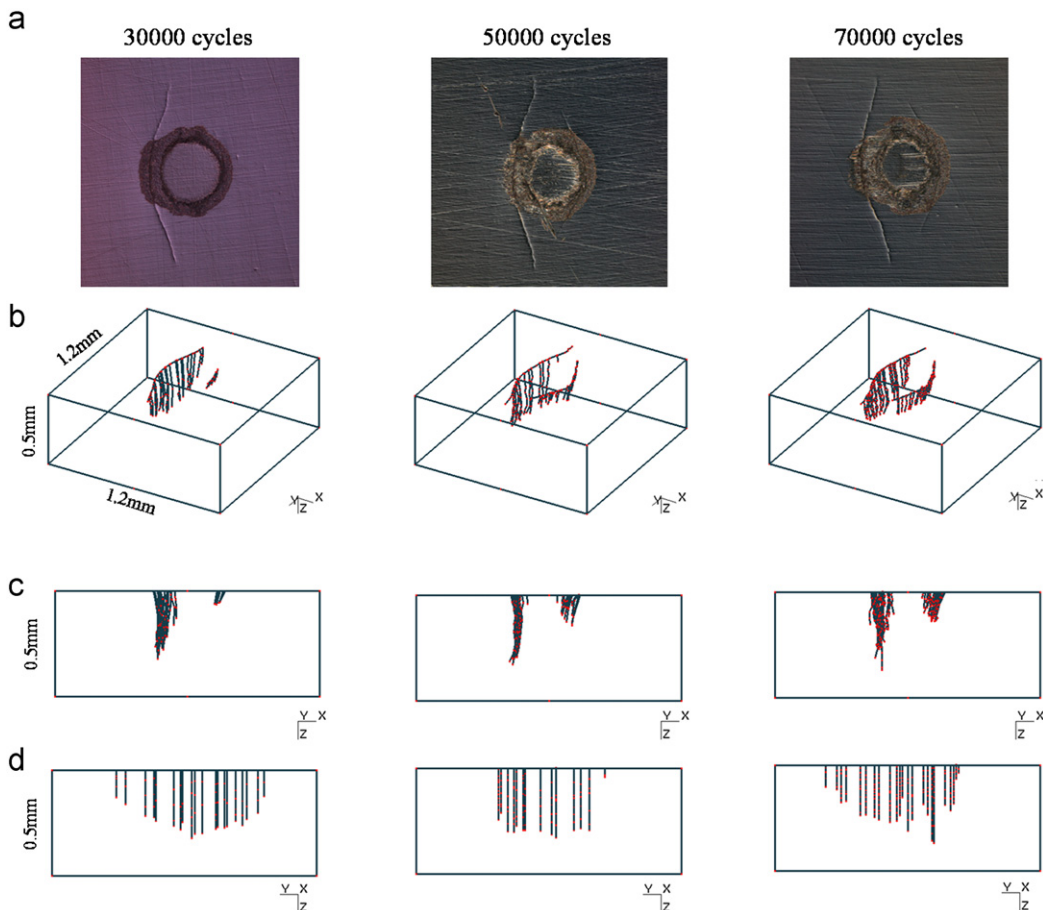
Three-dimensional post-mortem reconstruction of the 3D fretting crack geometries using plane sections of the cracked sample submitted to 30,000, 50,000 and 70,000 fretting cycles (a) cracked contact surface; (b) reconstructed 3D crack shape; (c) projection on plane $y=0$; (d) projection on plane $x=0$.
